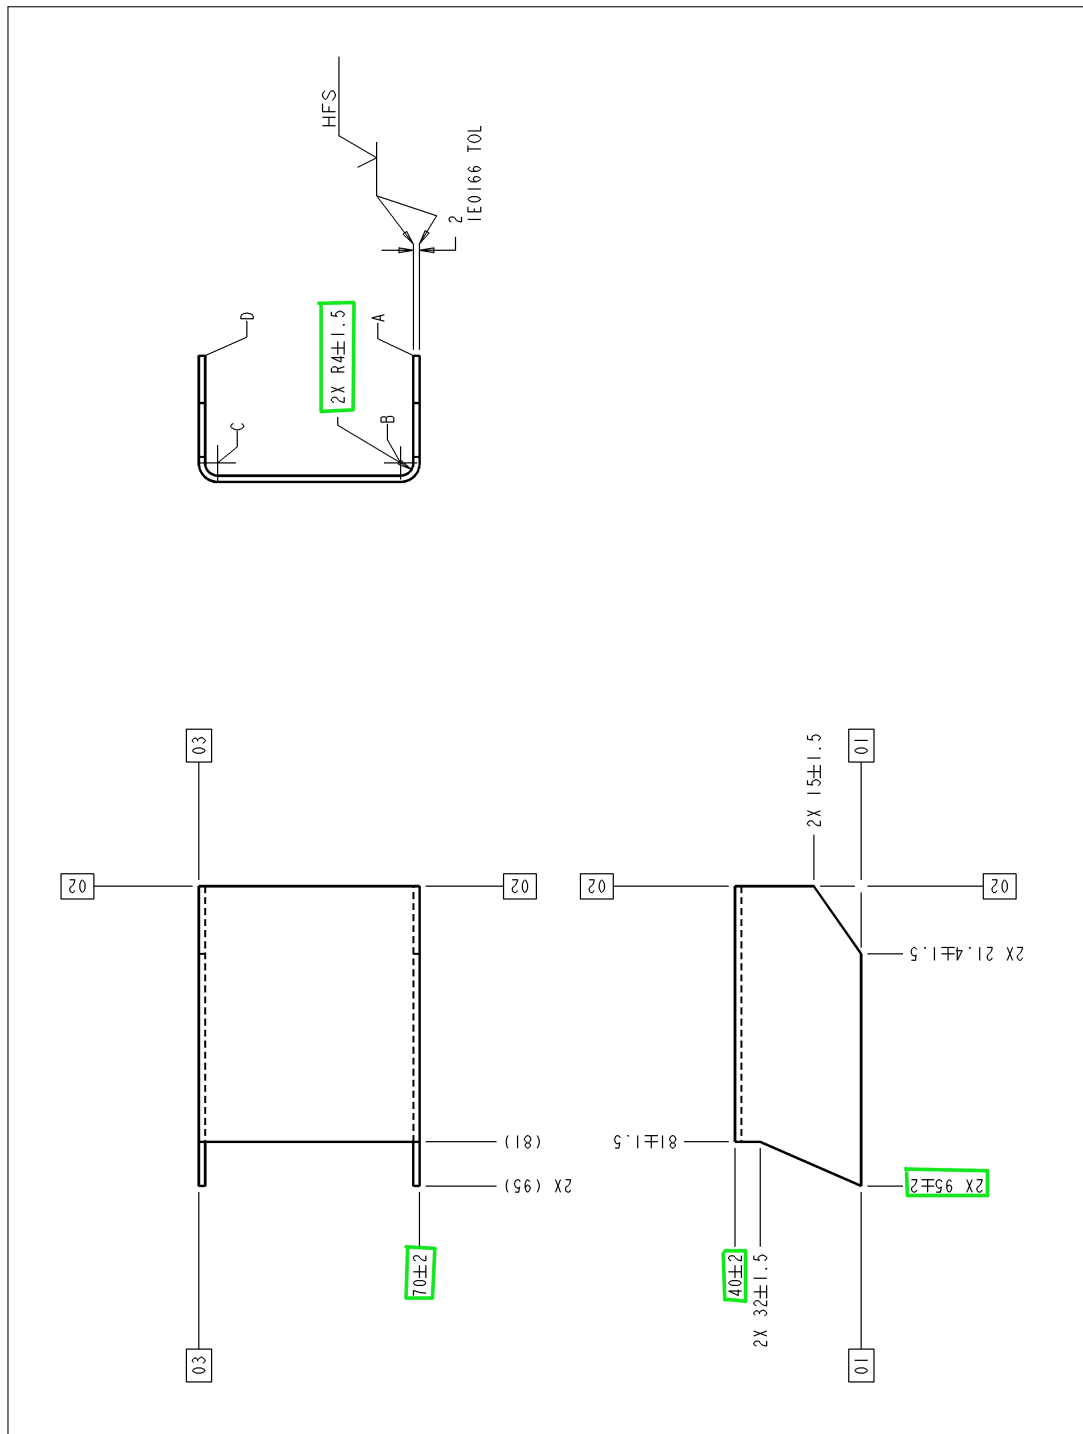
Engineering drawing obtained by modifying the drawing shown in Fig. 1.1. The dimensions which are modified are shown in green bounding boxes.
